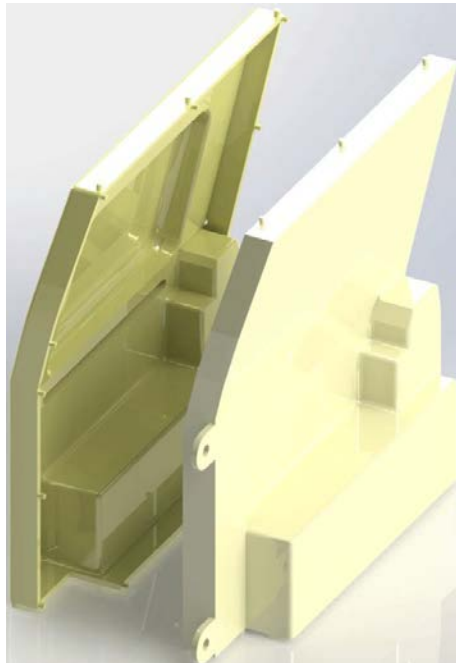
Render of a complex panel from the test bed design in SolidWorks
